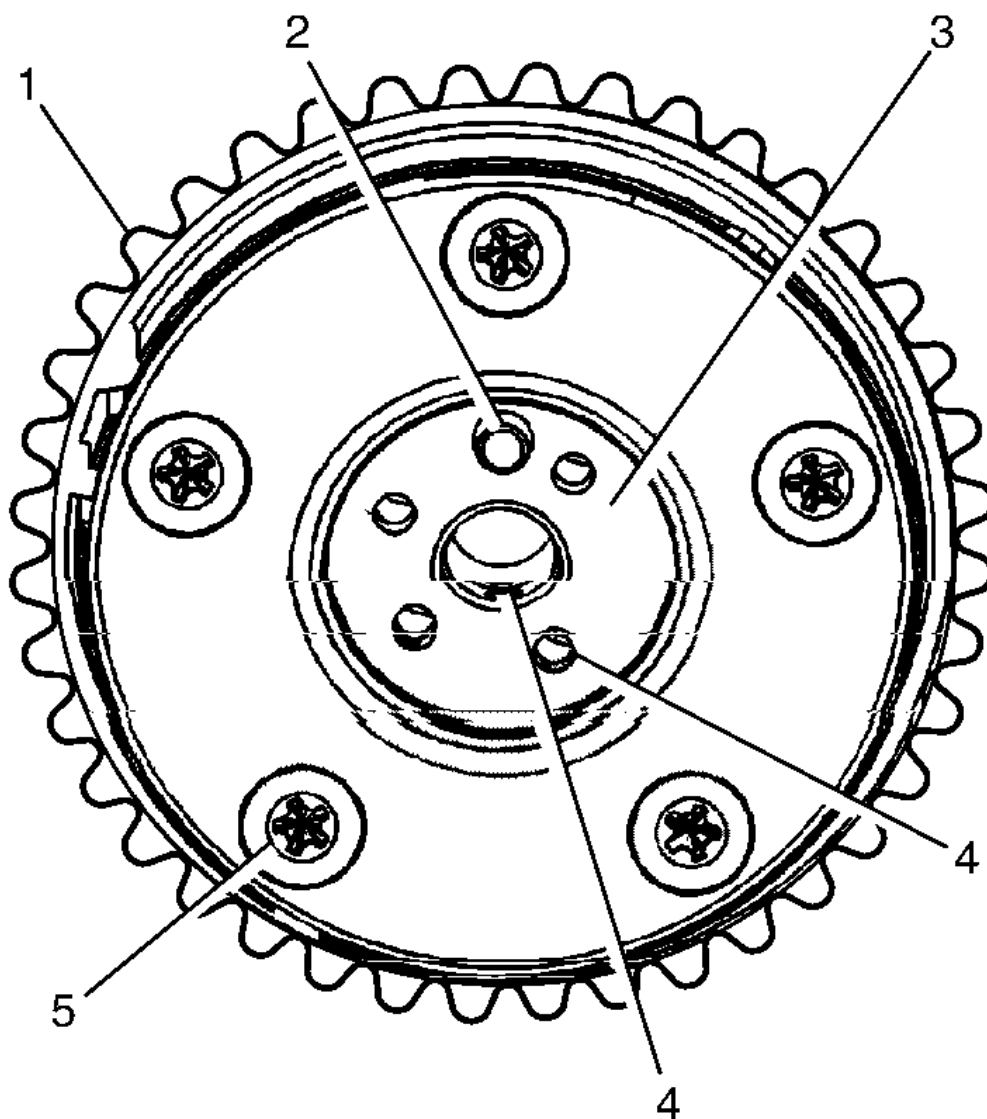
Identifying Back Of Intake/Exhaust Camshaft Position Actuators
